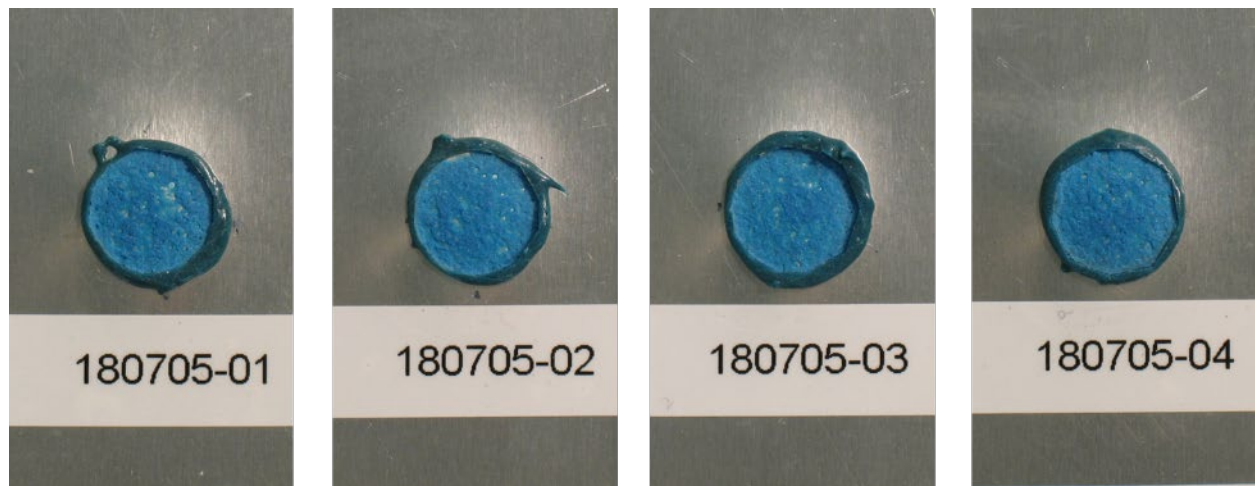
Failure surfaces of as-received aluminum/Betamate PATTI specimens.
